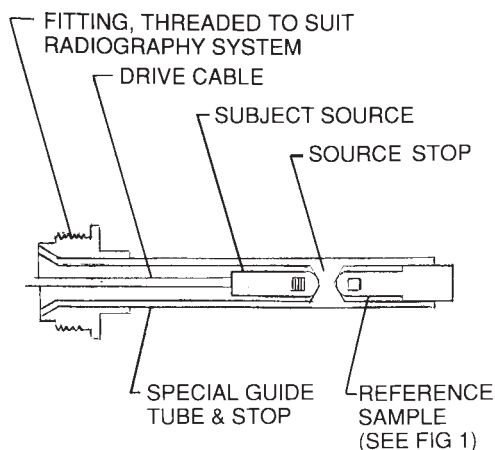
Typical Arrangement Using a Specially Designed Guide Tube
